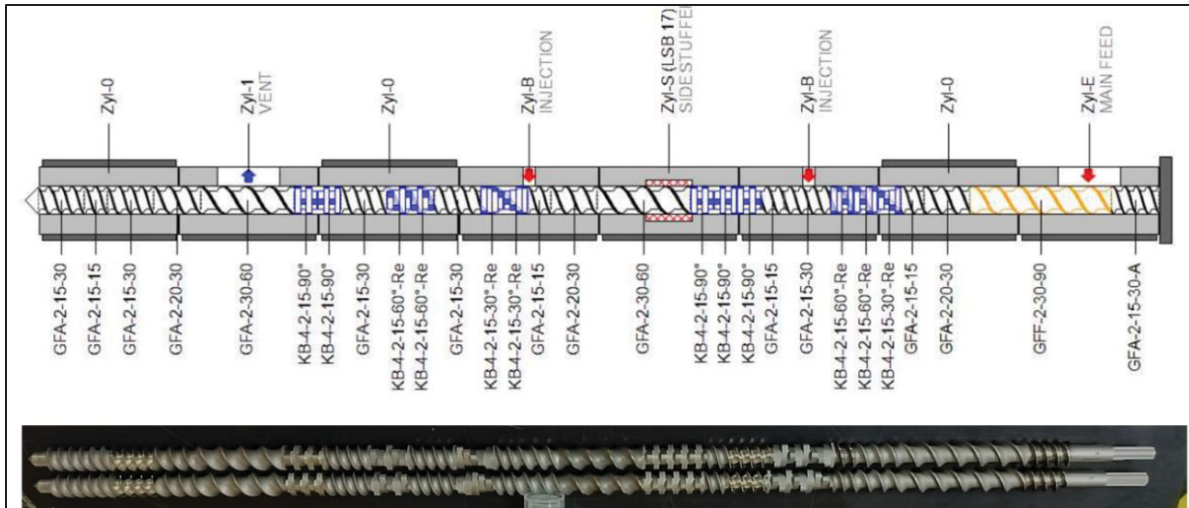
Leistritz extruder screws profile, extruding material from right to left. Mixing sections are highlighted in blue and transport sections in black. The initial transport section located below the main feeding point is highlighted in yellow
